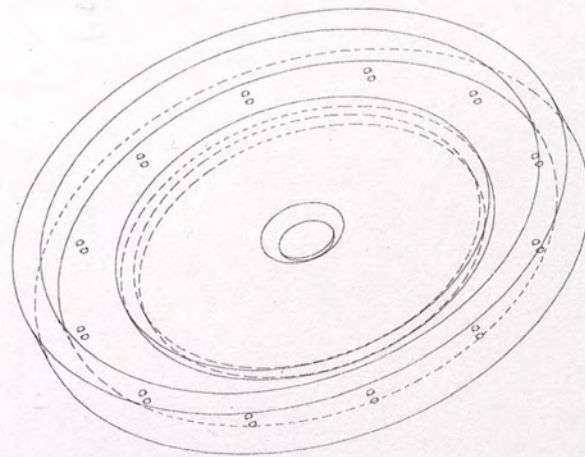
Projected prototype structure of evaporator and condenser base unit.
